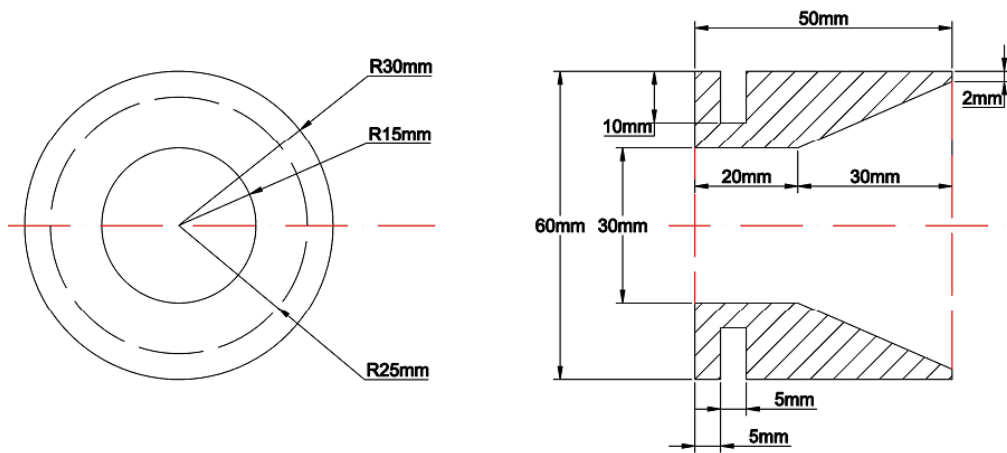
Model V : Narrow embedded electrode assembly (Sectional view)
